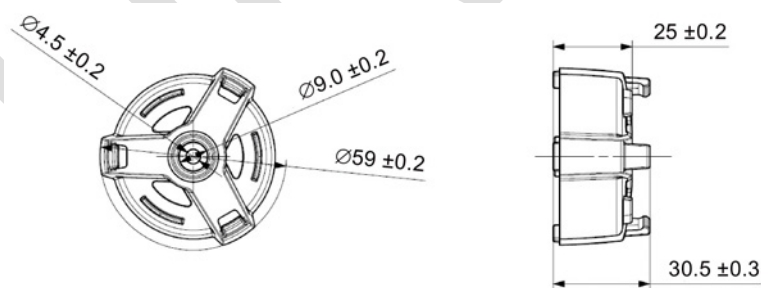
Dimension drawing of spacer 6GT2690-0AL00
